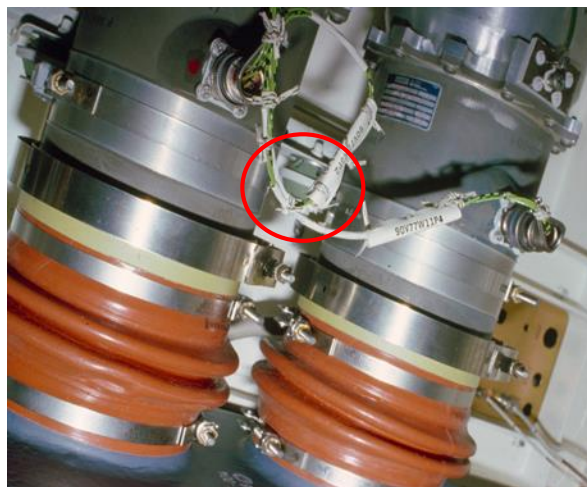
Baseline Space Shuttle fan and pump isolator assembly.
